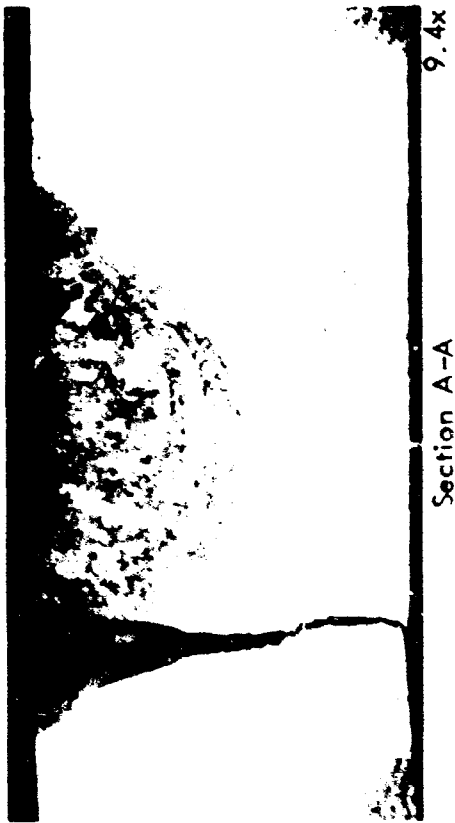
CRACK PATH AND FRACTURE APPEARANCE IN 2021-T81 ALUMINUM
